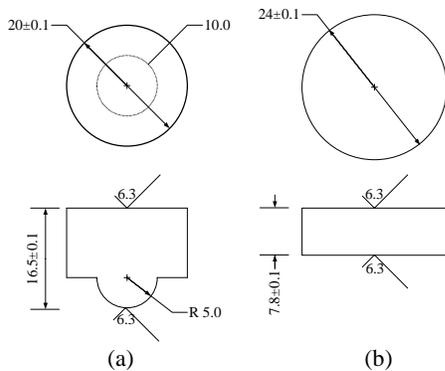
Ball-on-disk type wear specimens; (a) upper and (b) lower specimens.
